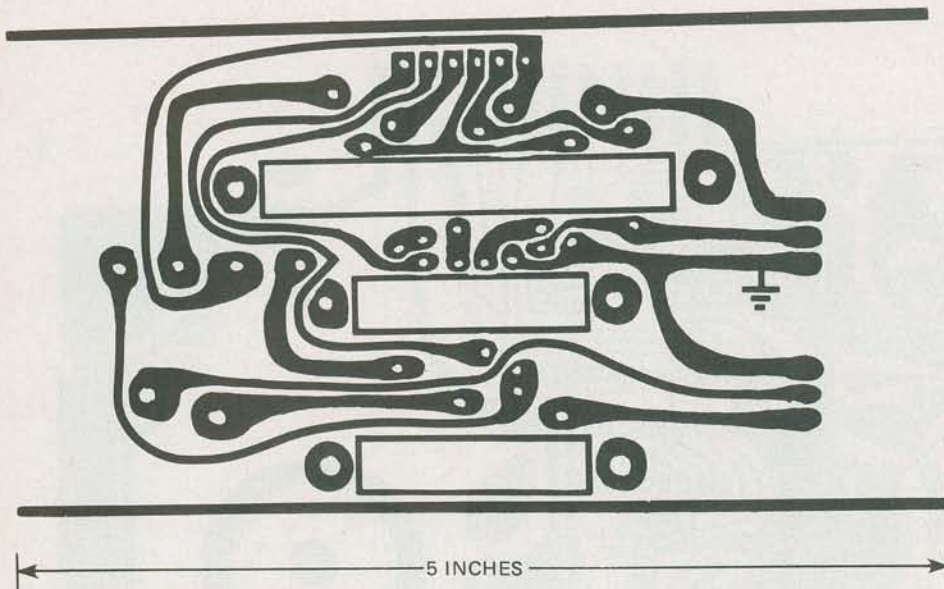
FOIL PATTERN for board 4 is shown here. The three rectangles should be cut out to accommodate the edge connectors.
